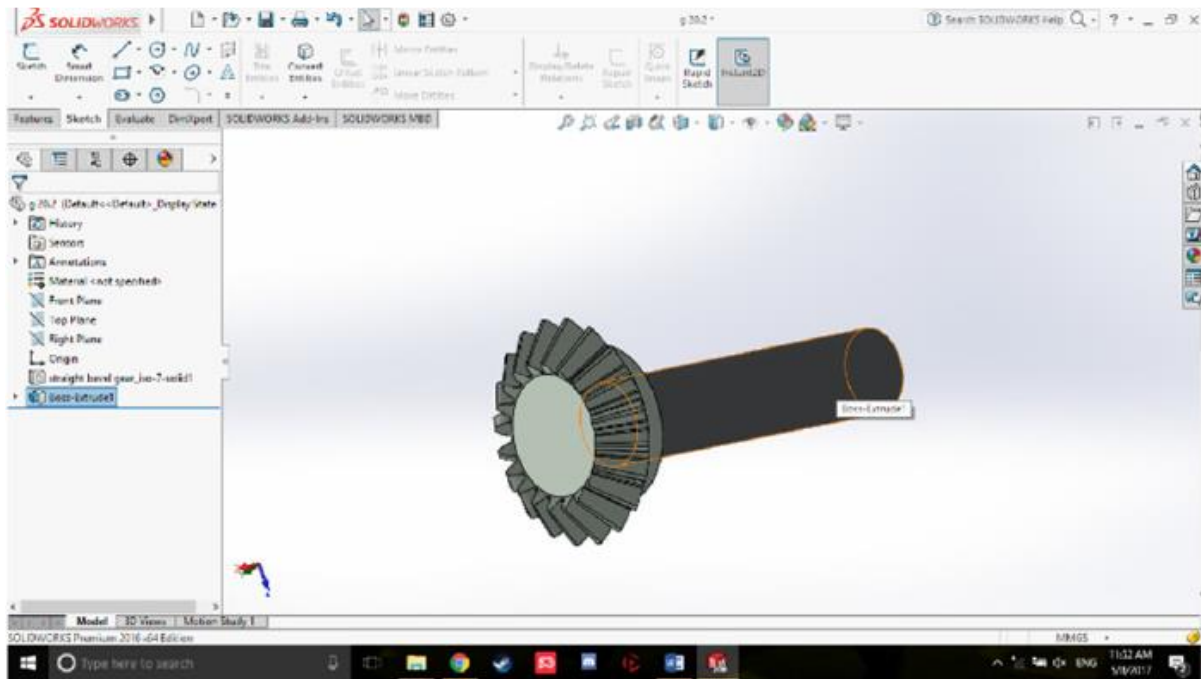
It is the second bevel side gear. This figure represents the modelling of second side gear in Solid works. It is created by drawing the bevel gear profile from prerequisites and removing the faces of bevel gear tooth for 45 deg mating of other gears for assembly and adding an extrude stub axles to it.
